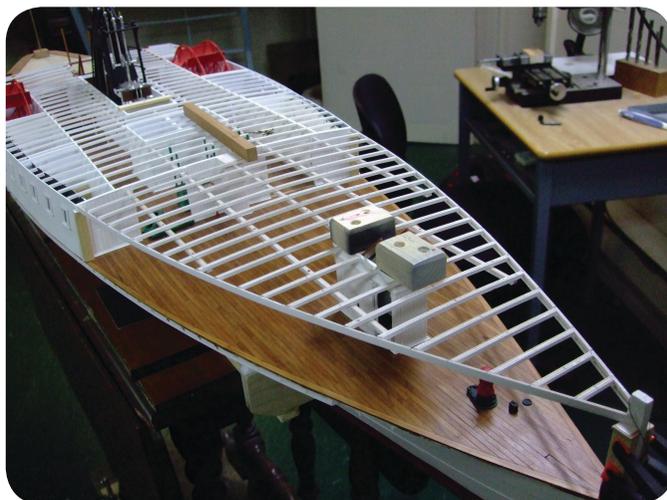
Once the side beams were cured they were placed on top of the form and held in place by braces while ceiling joists were measured and glued in place.
